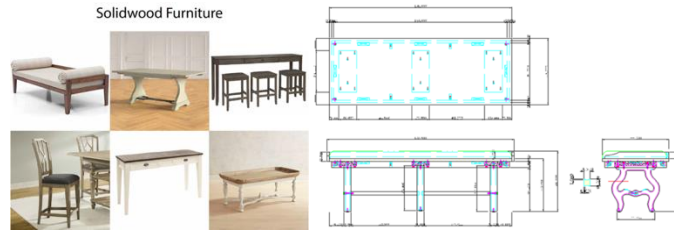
Types of solid wood furniture & Complex solid wood furniture computer drawing (orthogonal view only, not included parts drawing)
